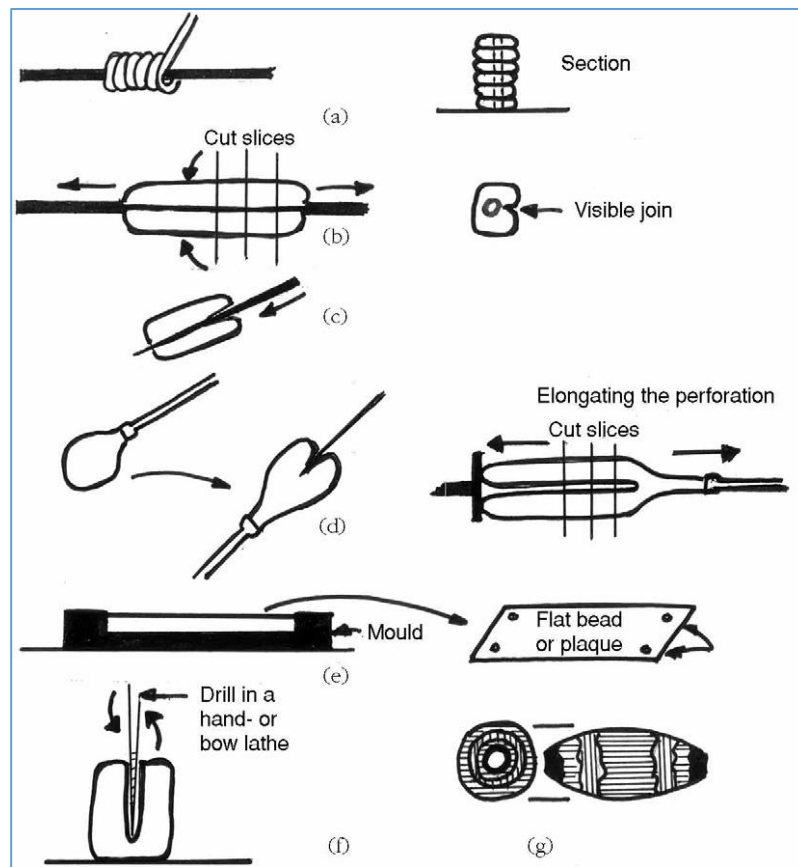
Techniques of bead making: (a) threading soft glass around a wire; (b) folding soft glass around a wire; (c) perforating a lump of soft glass; (d) perforating and drawing out a lump of glass; (e) fusing powdered glass in an open mould and drilling holes through the corners; (f) drilling through a cold lump of glass; (g) forming a mosaic glass bead. (Davinson, 2003)
